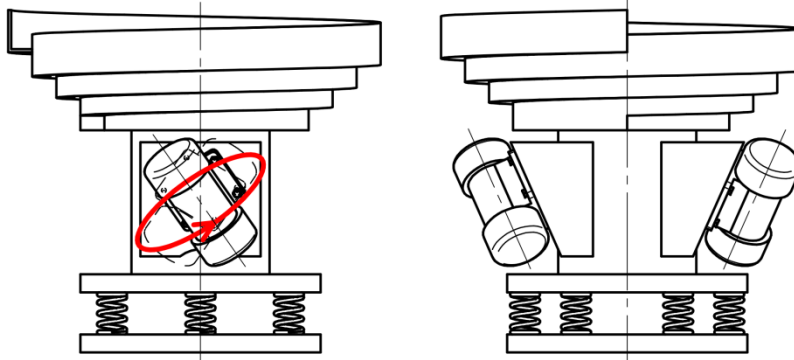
Spiral vibratory conveyor with tilted unbalance motors
